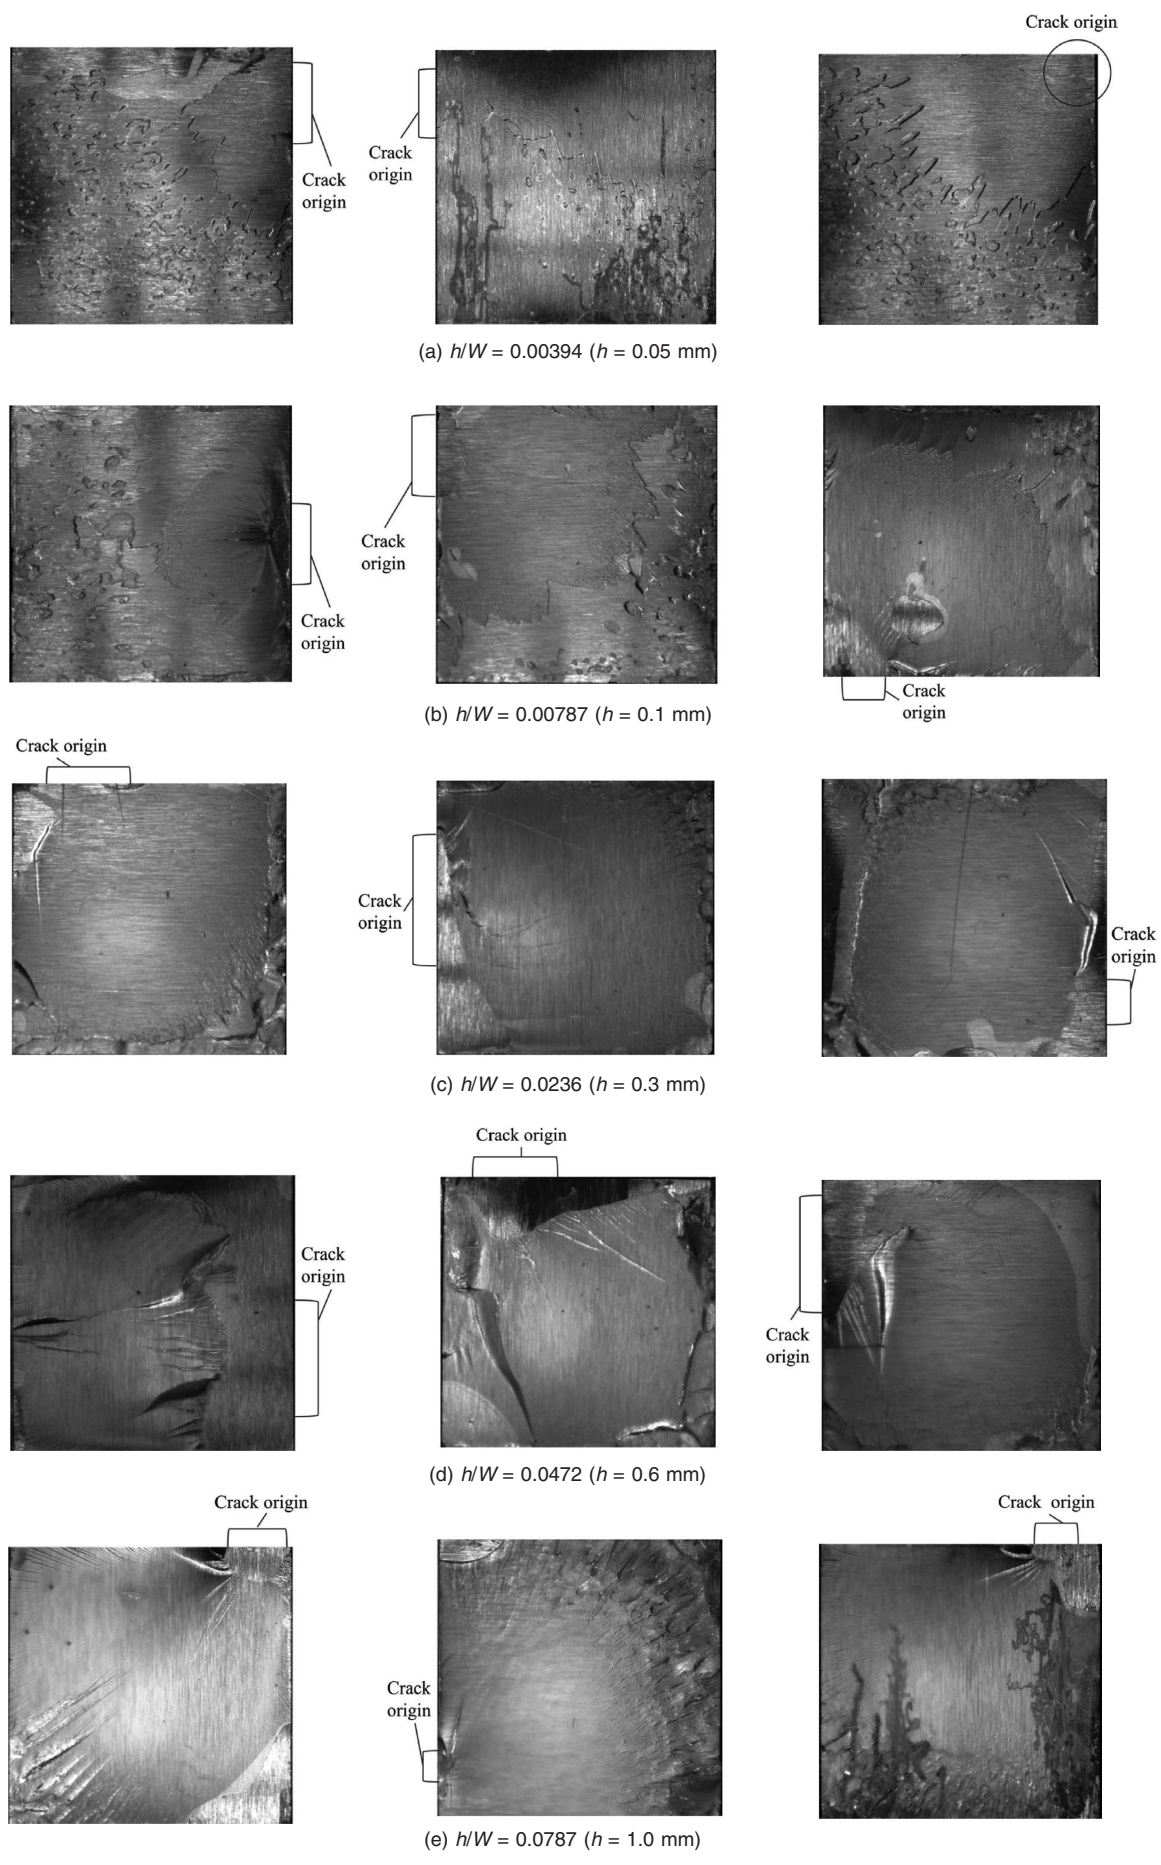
The fracture surface in the Suzuki's specimens
